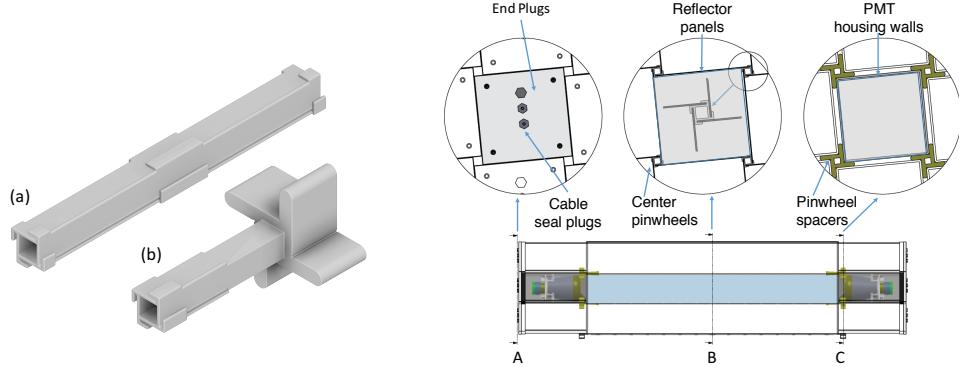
Representative pinwheel types. (a) Central pinwheel - Three tabs per side hold the optical separator in place. (b) End pinwheel - spacer arms separate the PMT housing bodies and support the pinwheel string.
